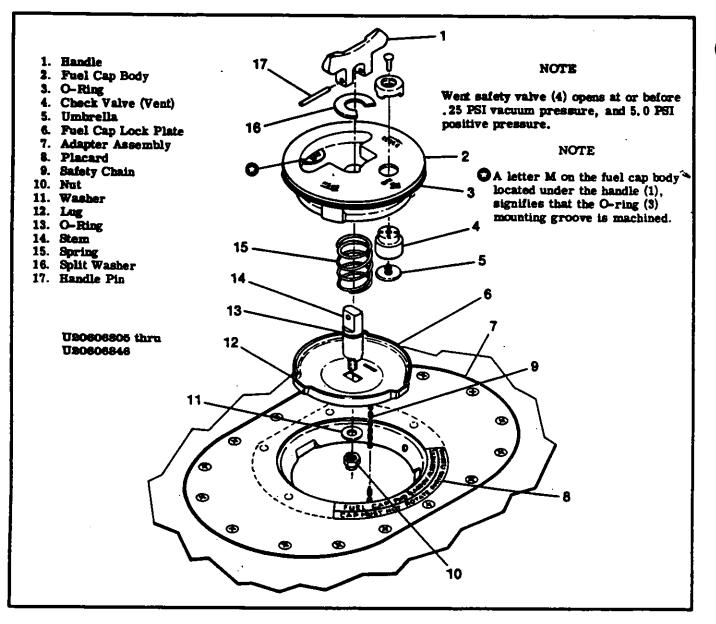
Fuel Filler Cap - Metal (Sheet 1 of 3)
